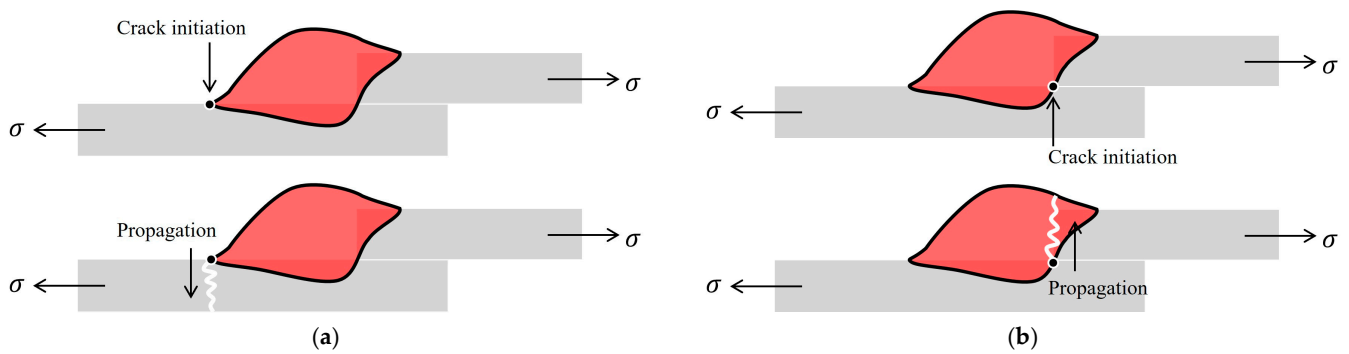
Schematic of fatigue fracture in lap joint welds. (a) Weld toe fracture and (b) weld root fracture.
